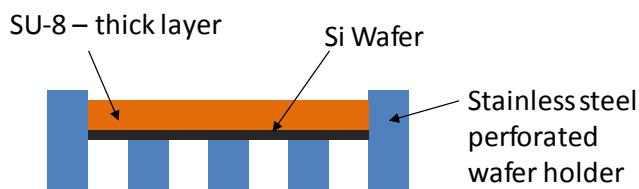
Specially designed stainless steel wafer holder with perforated holes and raised edges.
